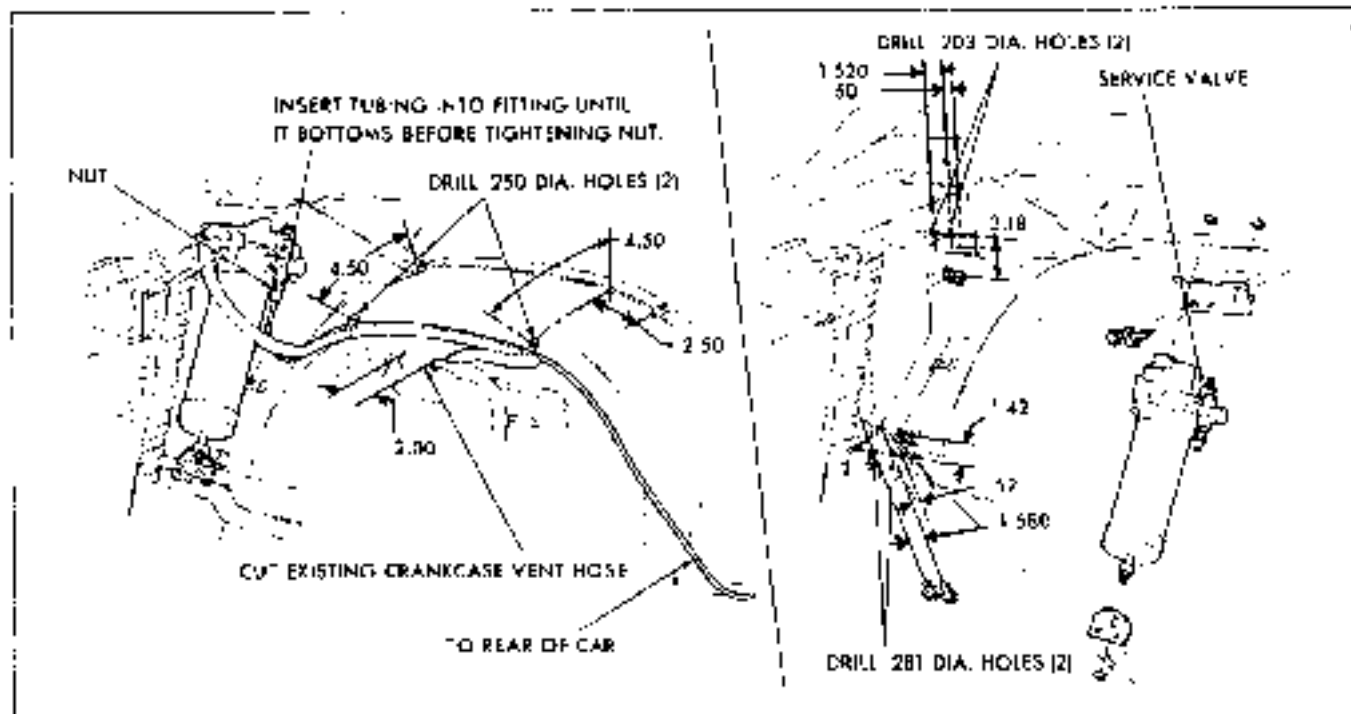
Installation of Automatic Level Control Compressor, Reservoir, and Regulator Valve Assembly
